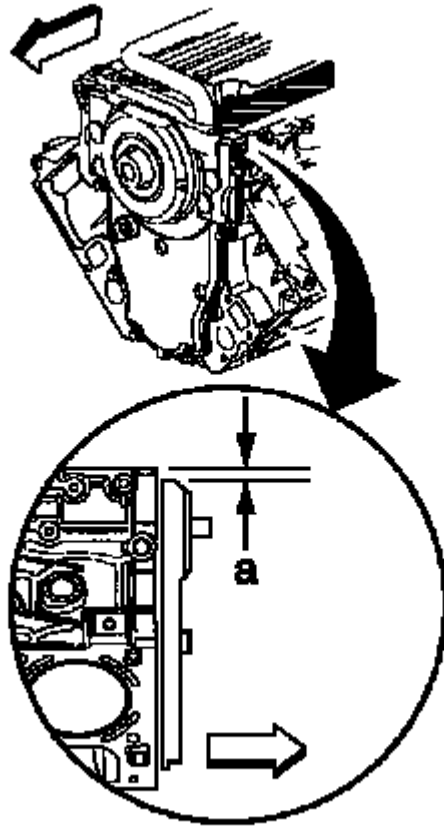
Measuring Oil Pan Surface Flatness & Front Cover-To-Engine Block
